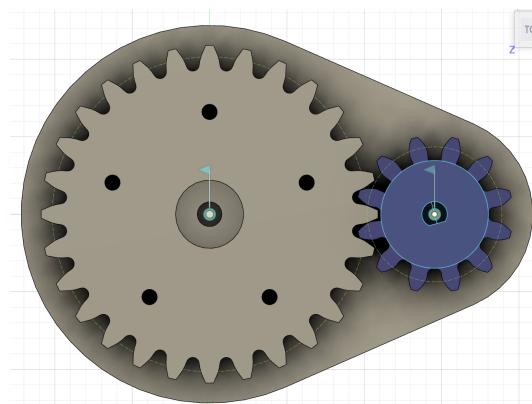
Cad model for revised set of gears emphasizing the five holes for screws and the bearing insert.
